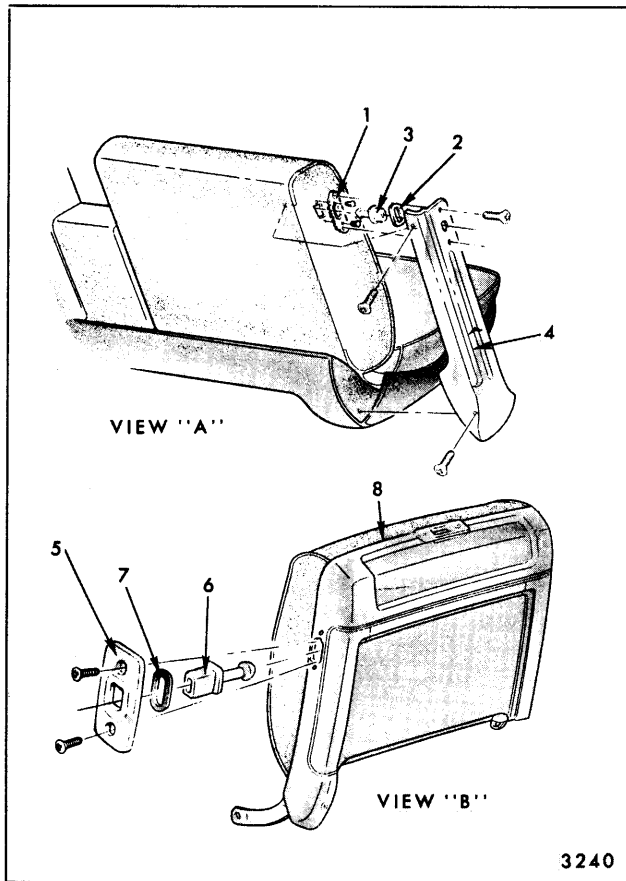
Seat Back Lock Push Button - "C & E"
